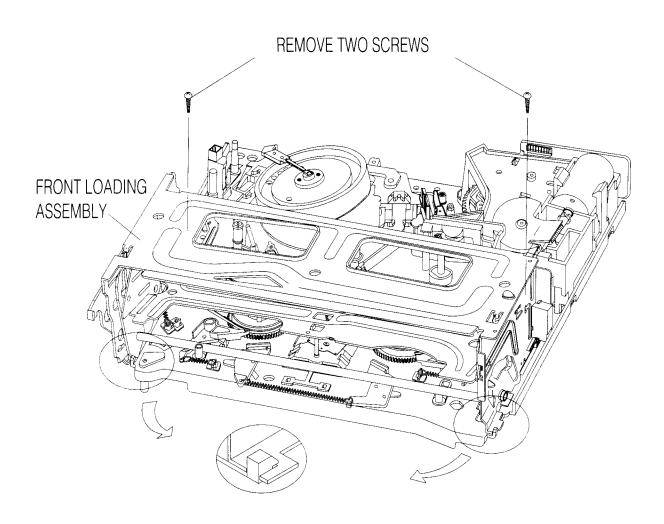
FRONT LOADING ASS'Y SEPARATION
